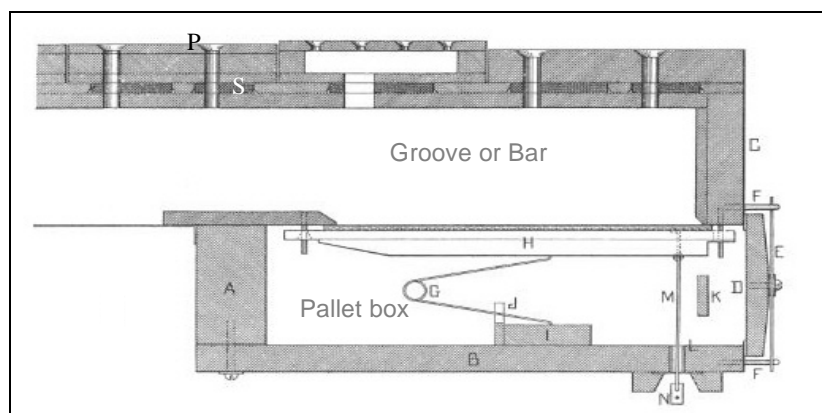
Cross section of a bar (groove) and slider windchest adapted from Audsley Fig CLIX.
